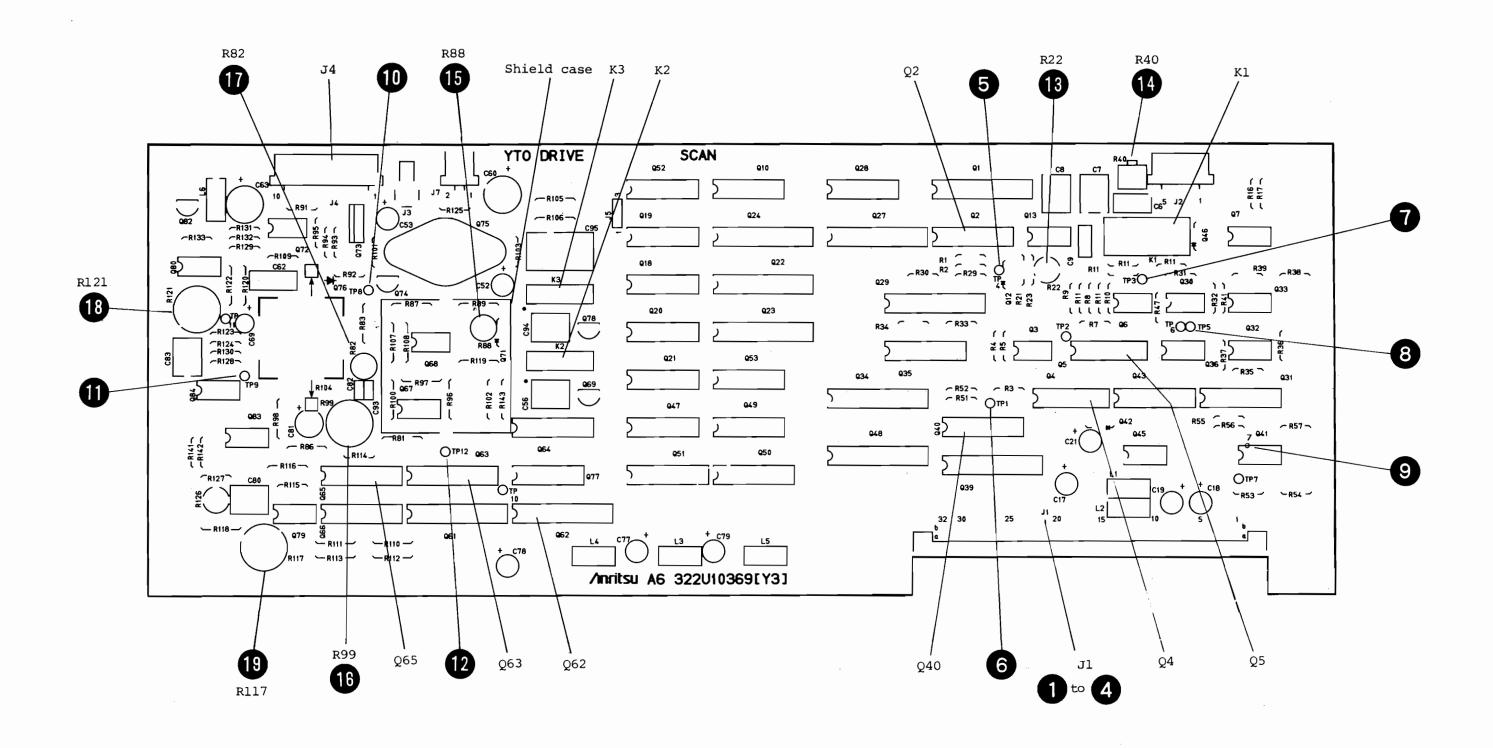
(a) A6 SCAN/YTO DRIVE PC Board Parts Layout (Parts Side) 19
